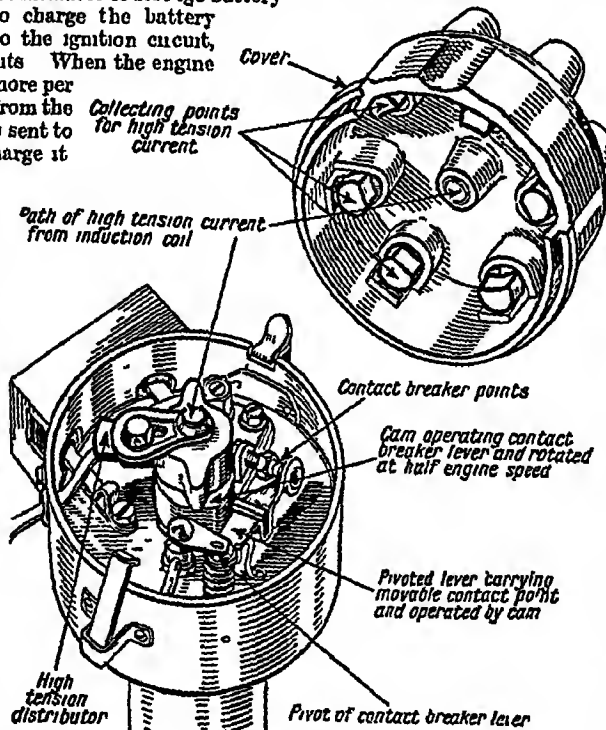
Typical distributor and contact breaker for six cylinder engine using coil ignition.
